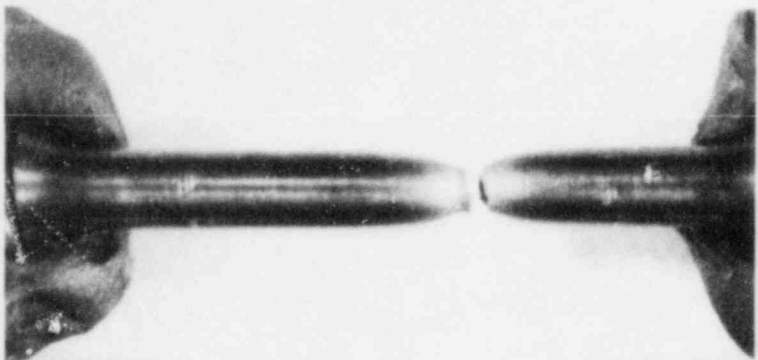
Fracture Location, Necking Behavior, and Fracture Appearance for Irradiated Weld Metal Tensile Specimens
